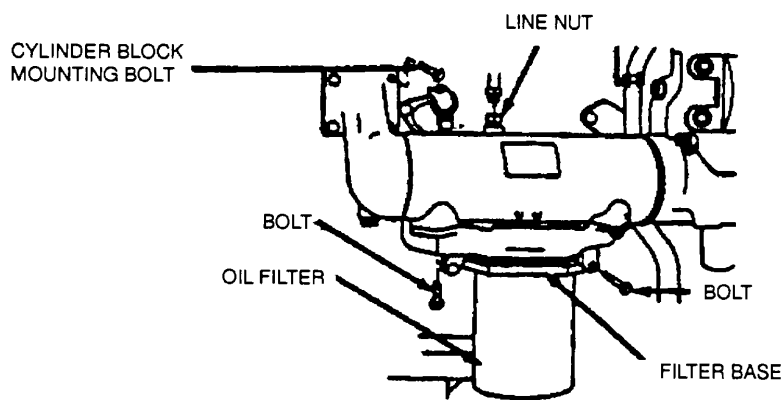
HP Pump Diesel Engine Oil Filter.
